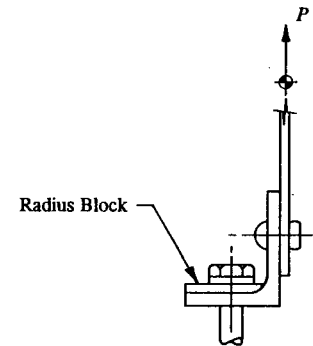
Radius block or fitted washer is used to increase the flange bending strength of a tension clip.
